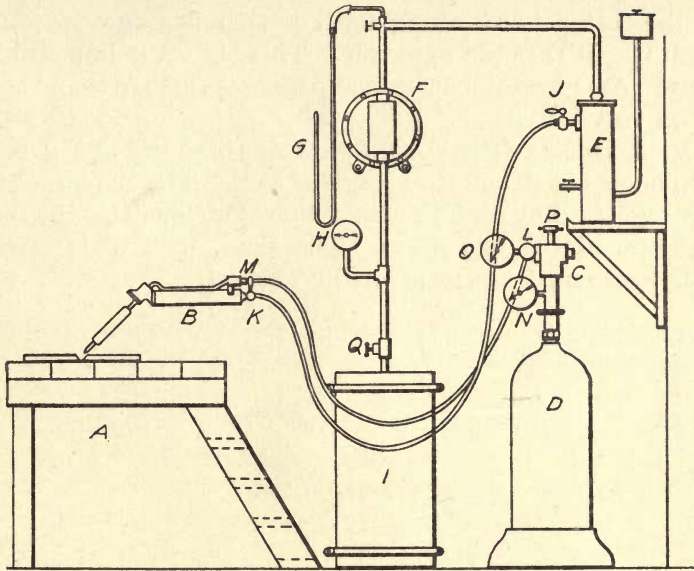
GENERAL ARRANGEMENT OF OXYACETYLENE WELDING APPARATUS.
